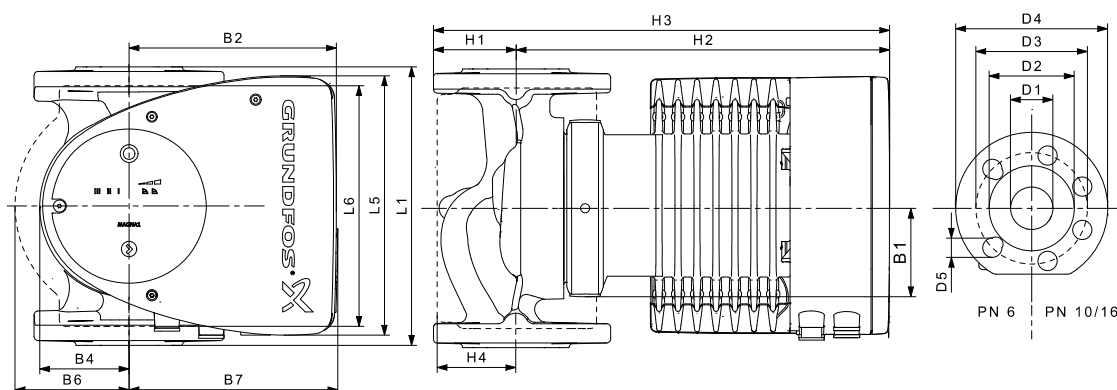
Single-head pump dimensions, terminal-connected versions, flanged version
